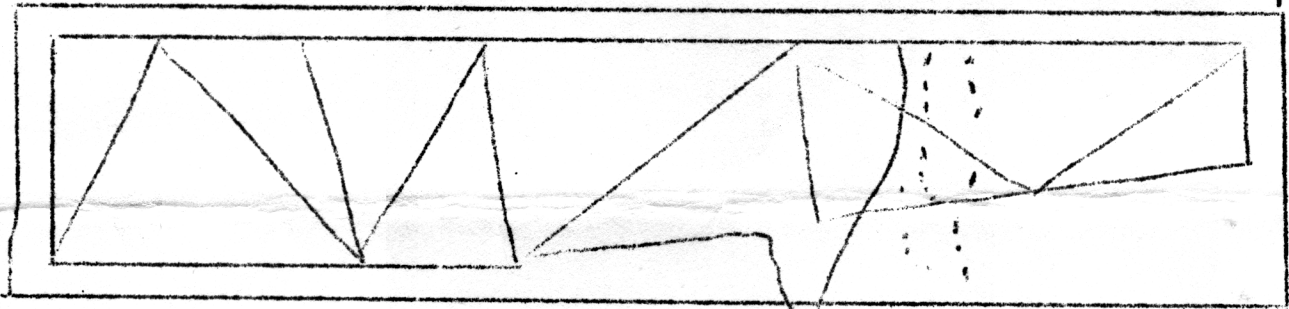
USE TAUT STRING TO LAY OUT LONGERONS
